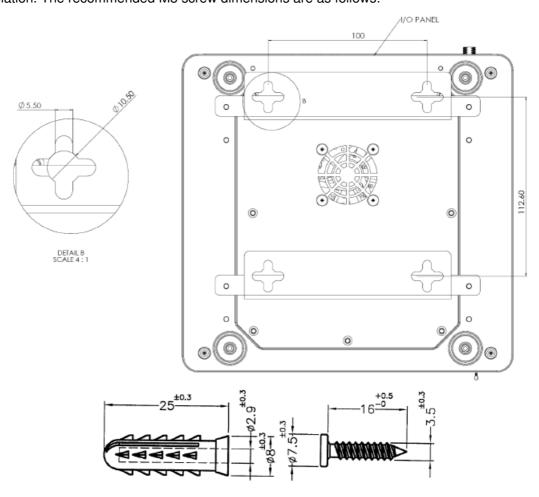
VEP1405 series wall mount, installation anchor, and screw dimensions
